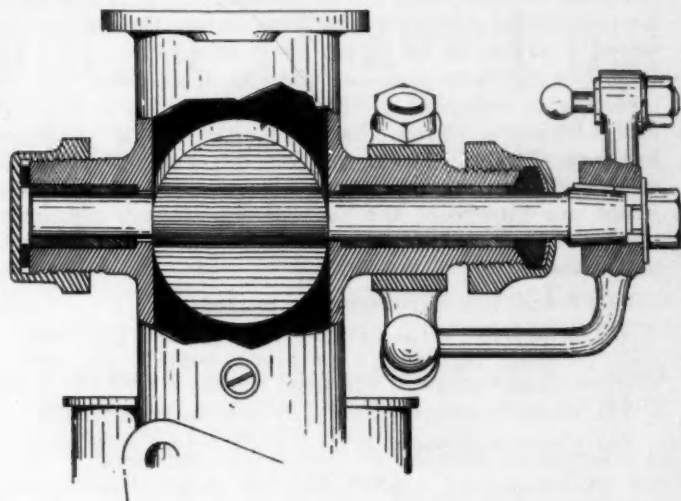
SECTIONAL VIEW THROUGH THE CARBURETER THROTTLE OF THE TYPES-J AND L ENGINE
